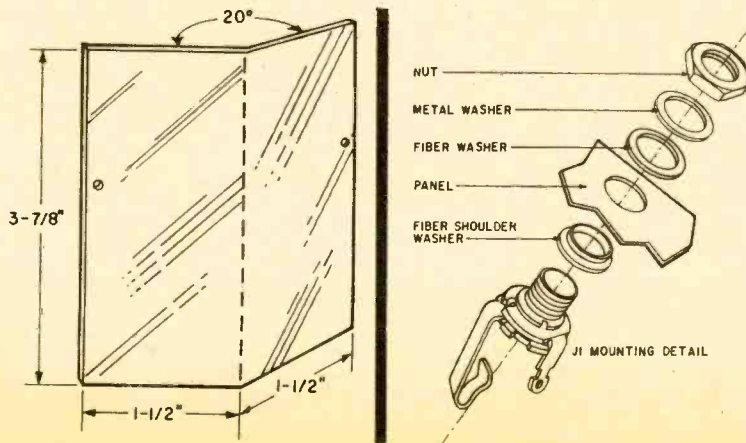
Sketch at far left is of supporting plate (of 1/16-in. scrap aluminum) that should be used to support and electrically connect front and rear panels so transmitter can be operated out of cabinet. Plate is shown in use in Fig. 6. Sketch at left shows method of mounting key jack J1 so it is insulated electrically from cabinet.
